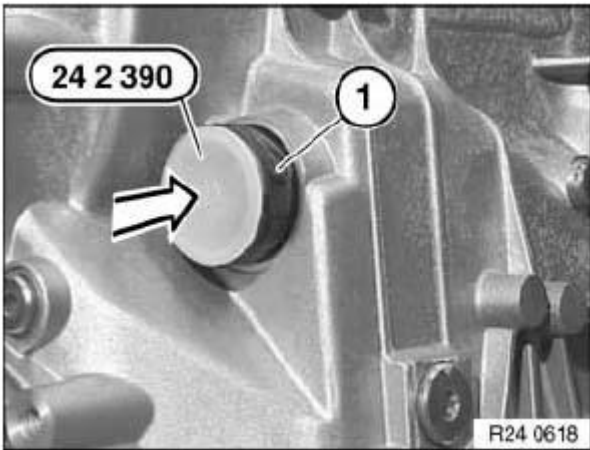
Inserting Special Tool (24 2 390) In Sealing Sleeve
